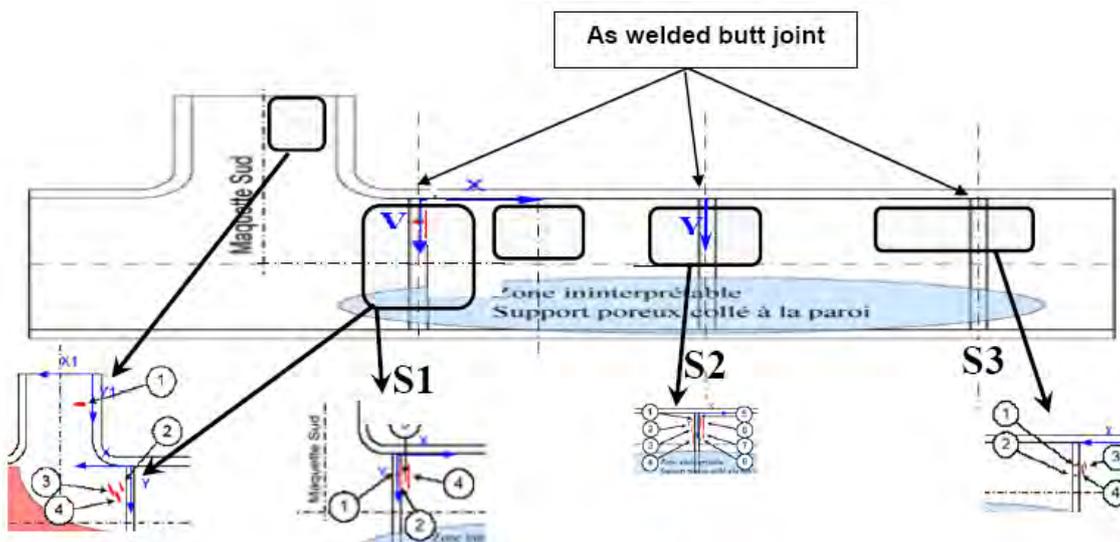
First half mock-up containing the as welded butt joint S1, S2 and S3 - Long dye penetrant inspection results and location of plate samples containing all defect indications
